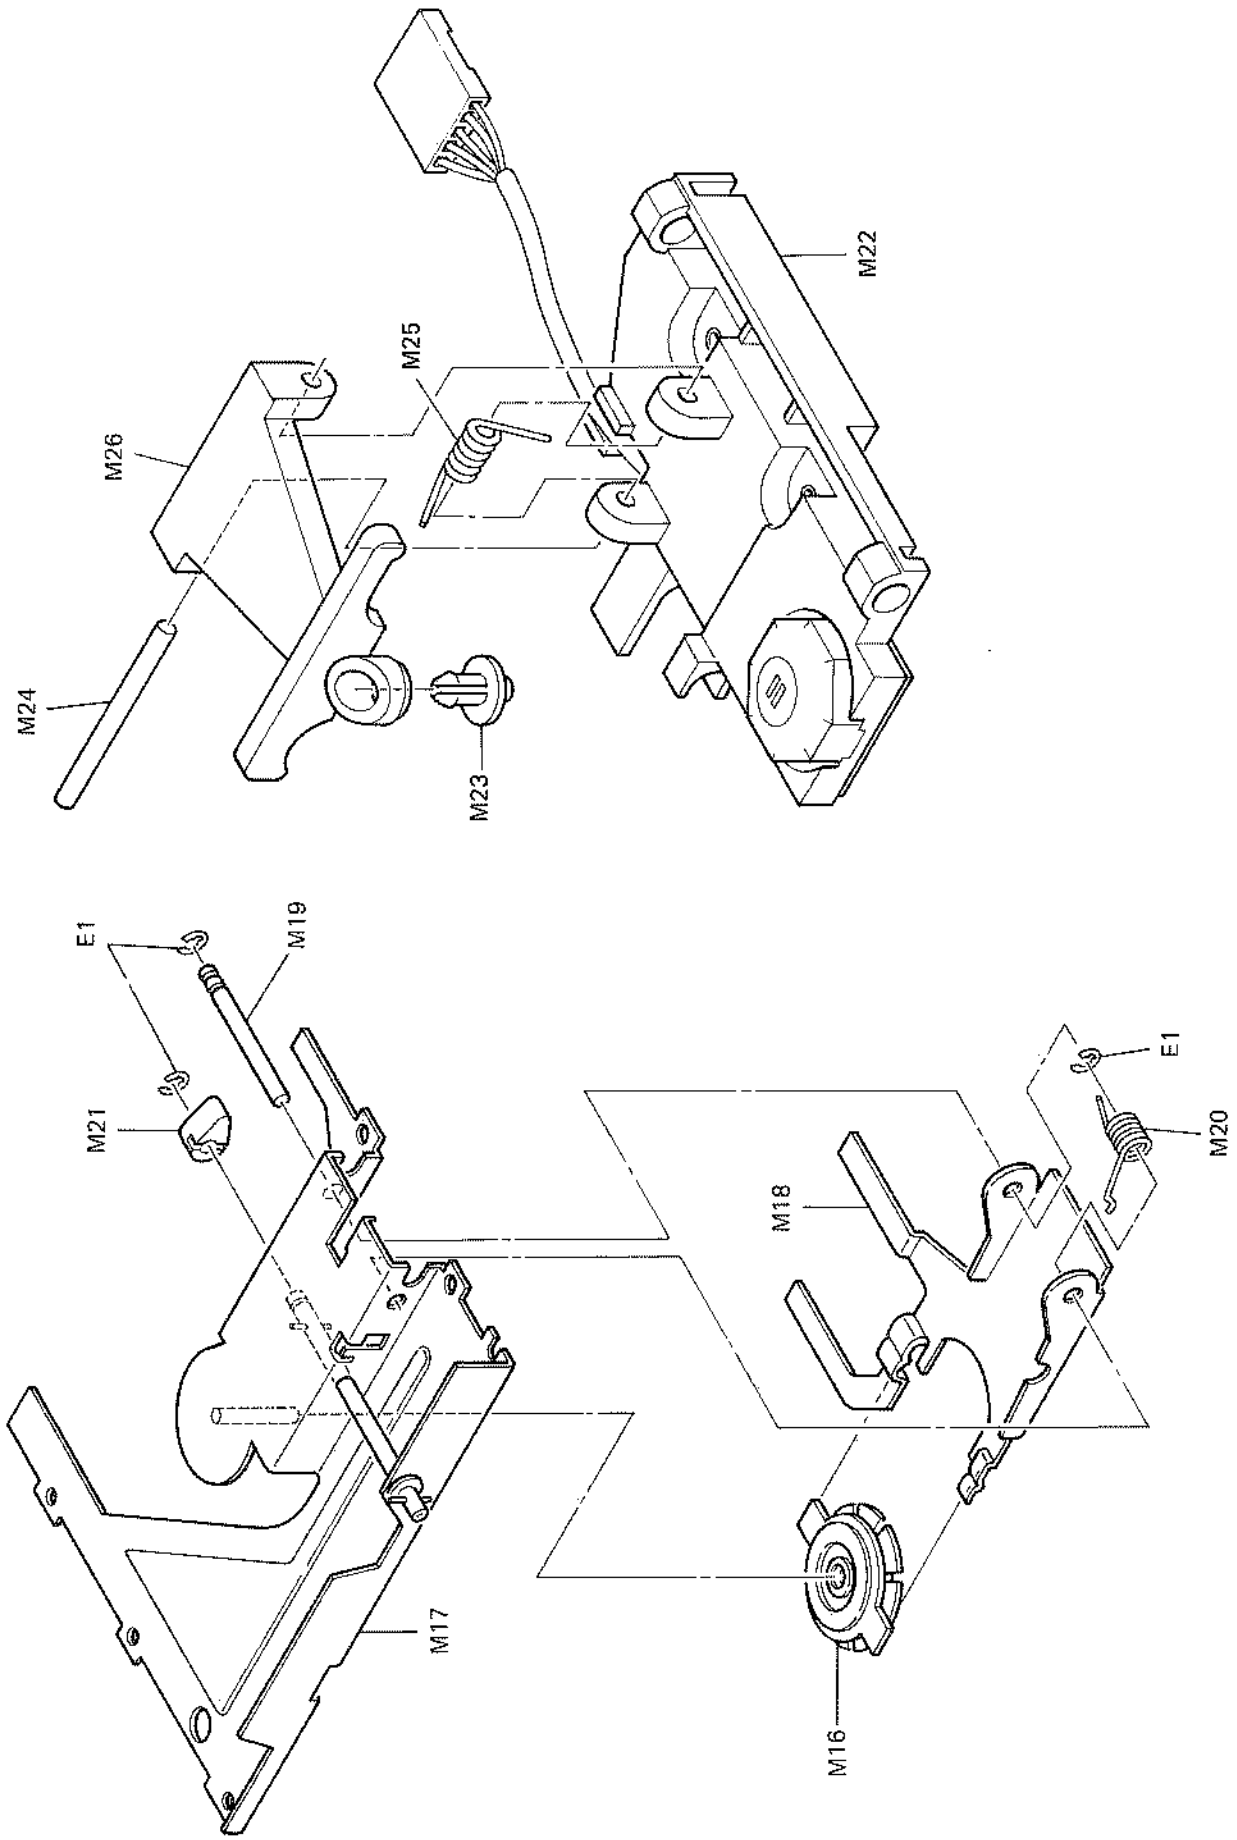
Exploded View of Clamp Base BK and Carrier A BK
